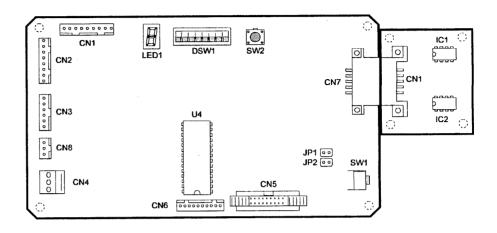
Indicator Control Board (OP-CON) Jumpers
